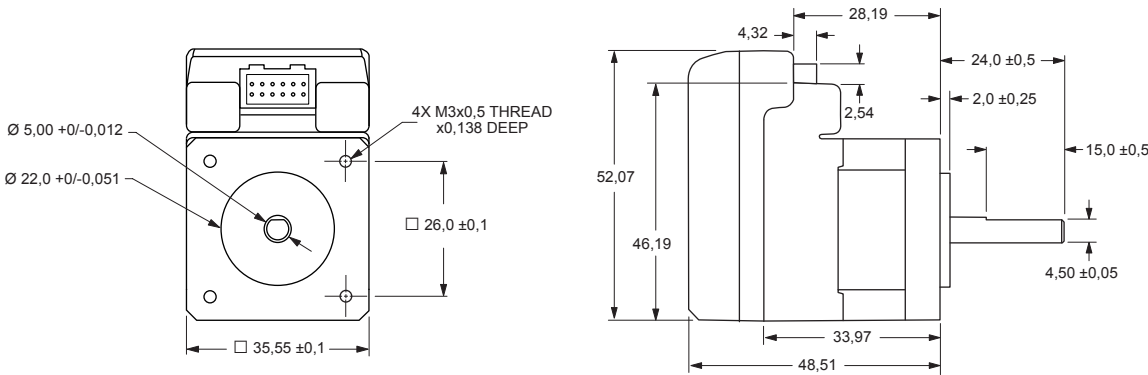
Mechanical specifications - dimensions in inches (mm)
